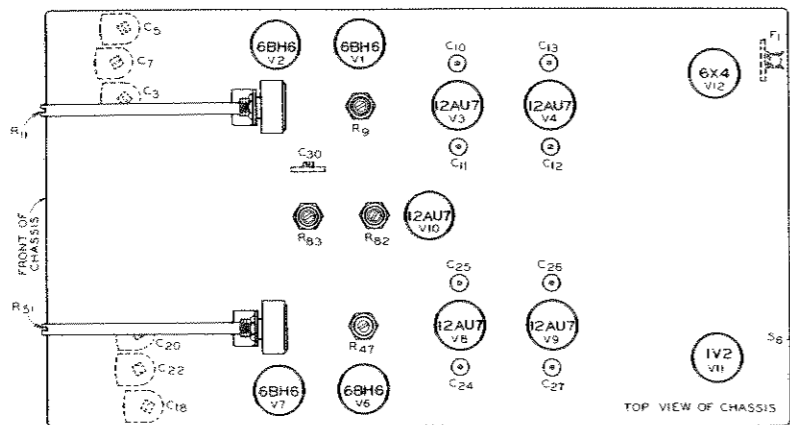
Location of Tubes and Adjustable Parts in the WO-56A
